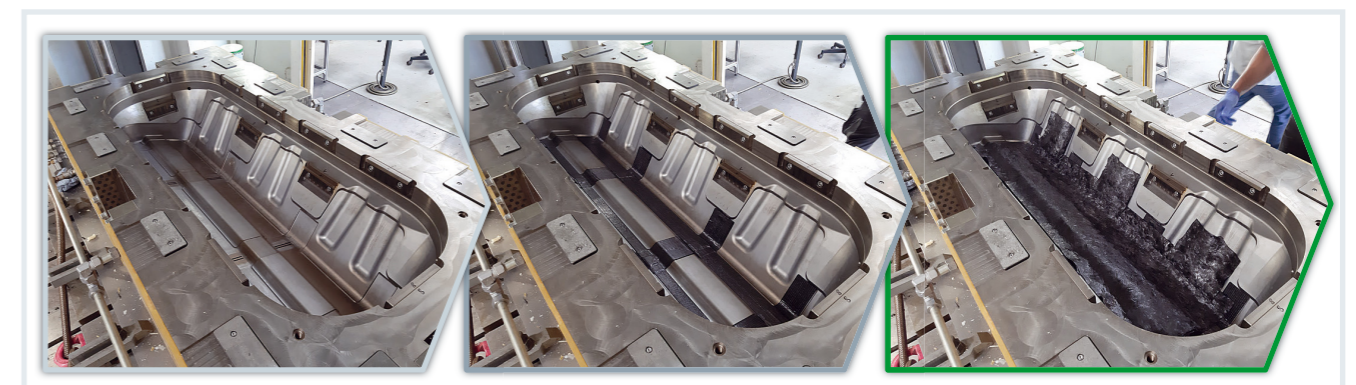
Lower half of the mold used to create the outer seat shell: Open mold, insertion of local reinforcement, insertion of SMC material into the mold (from left to right). © Fraunhofer ICT
